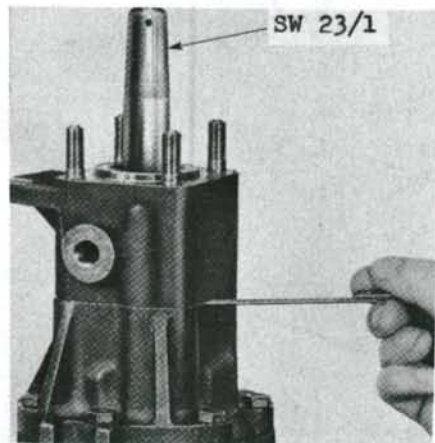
Using protector sleeve (SW 23/1 or FT.3147), install and bottom valve housing without shims; then measure shim pack thickness as shown. Install shims equal to measured clearance minus 0.003 inch (0.0076 mm).
